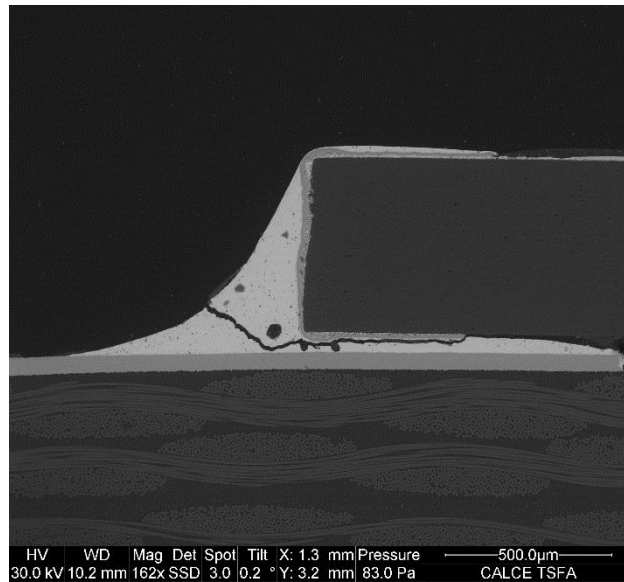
Solder Crack in R28 (Aged 0 Hours, Early Failure)
